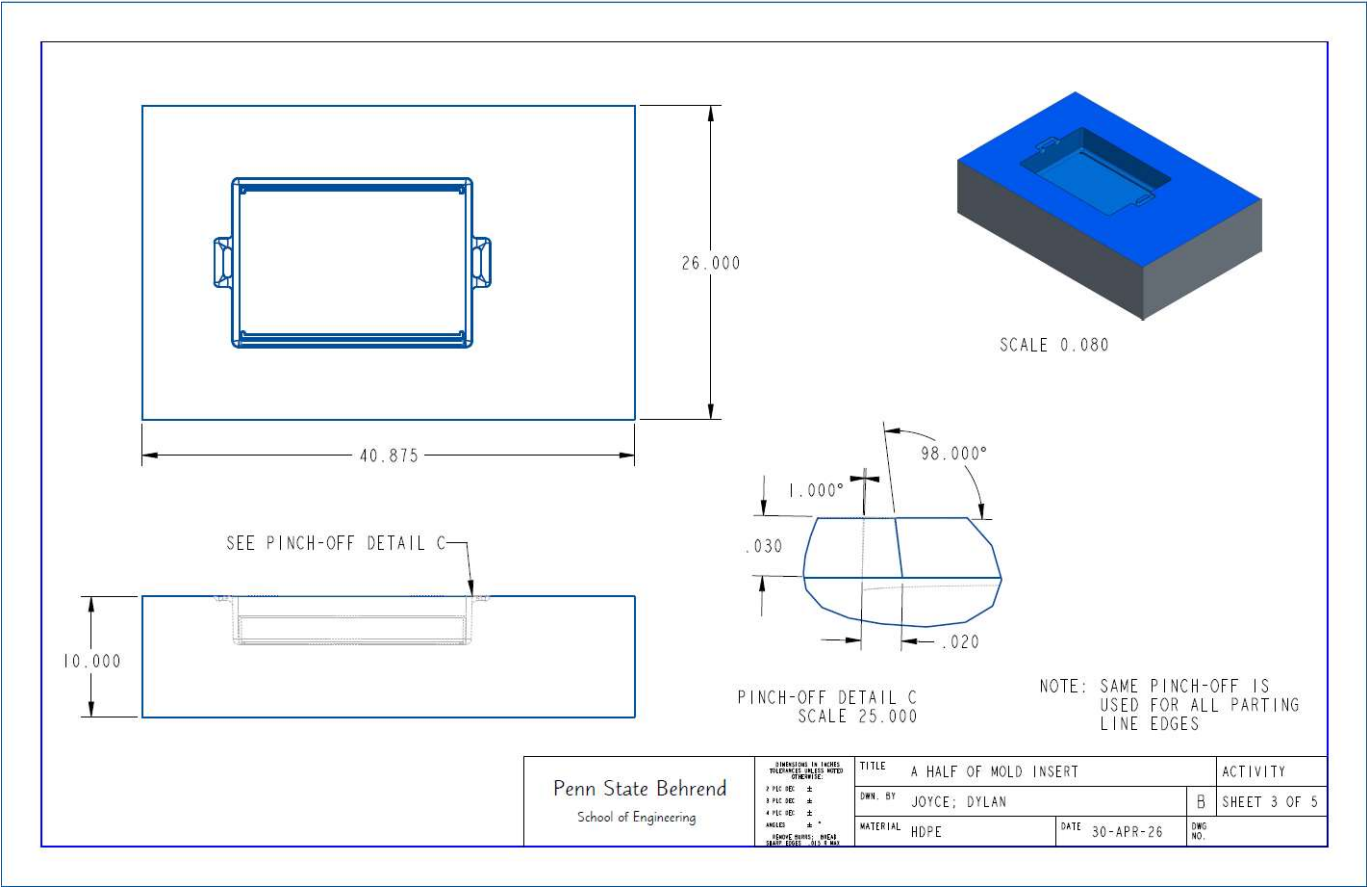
Dimensioned Drawing of A-Side of Mold Insert
